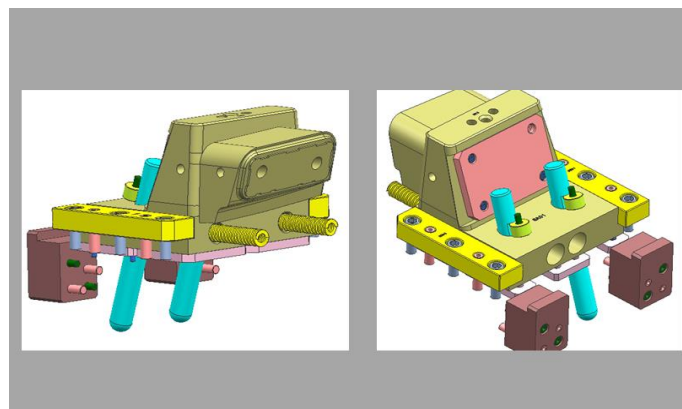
(b) Schematic diagram of the core pulling of the rear mold slider
